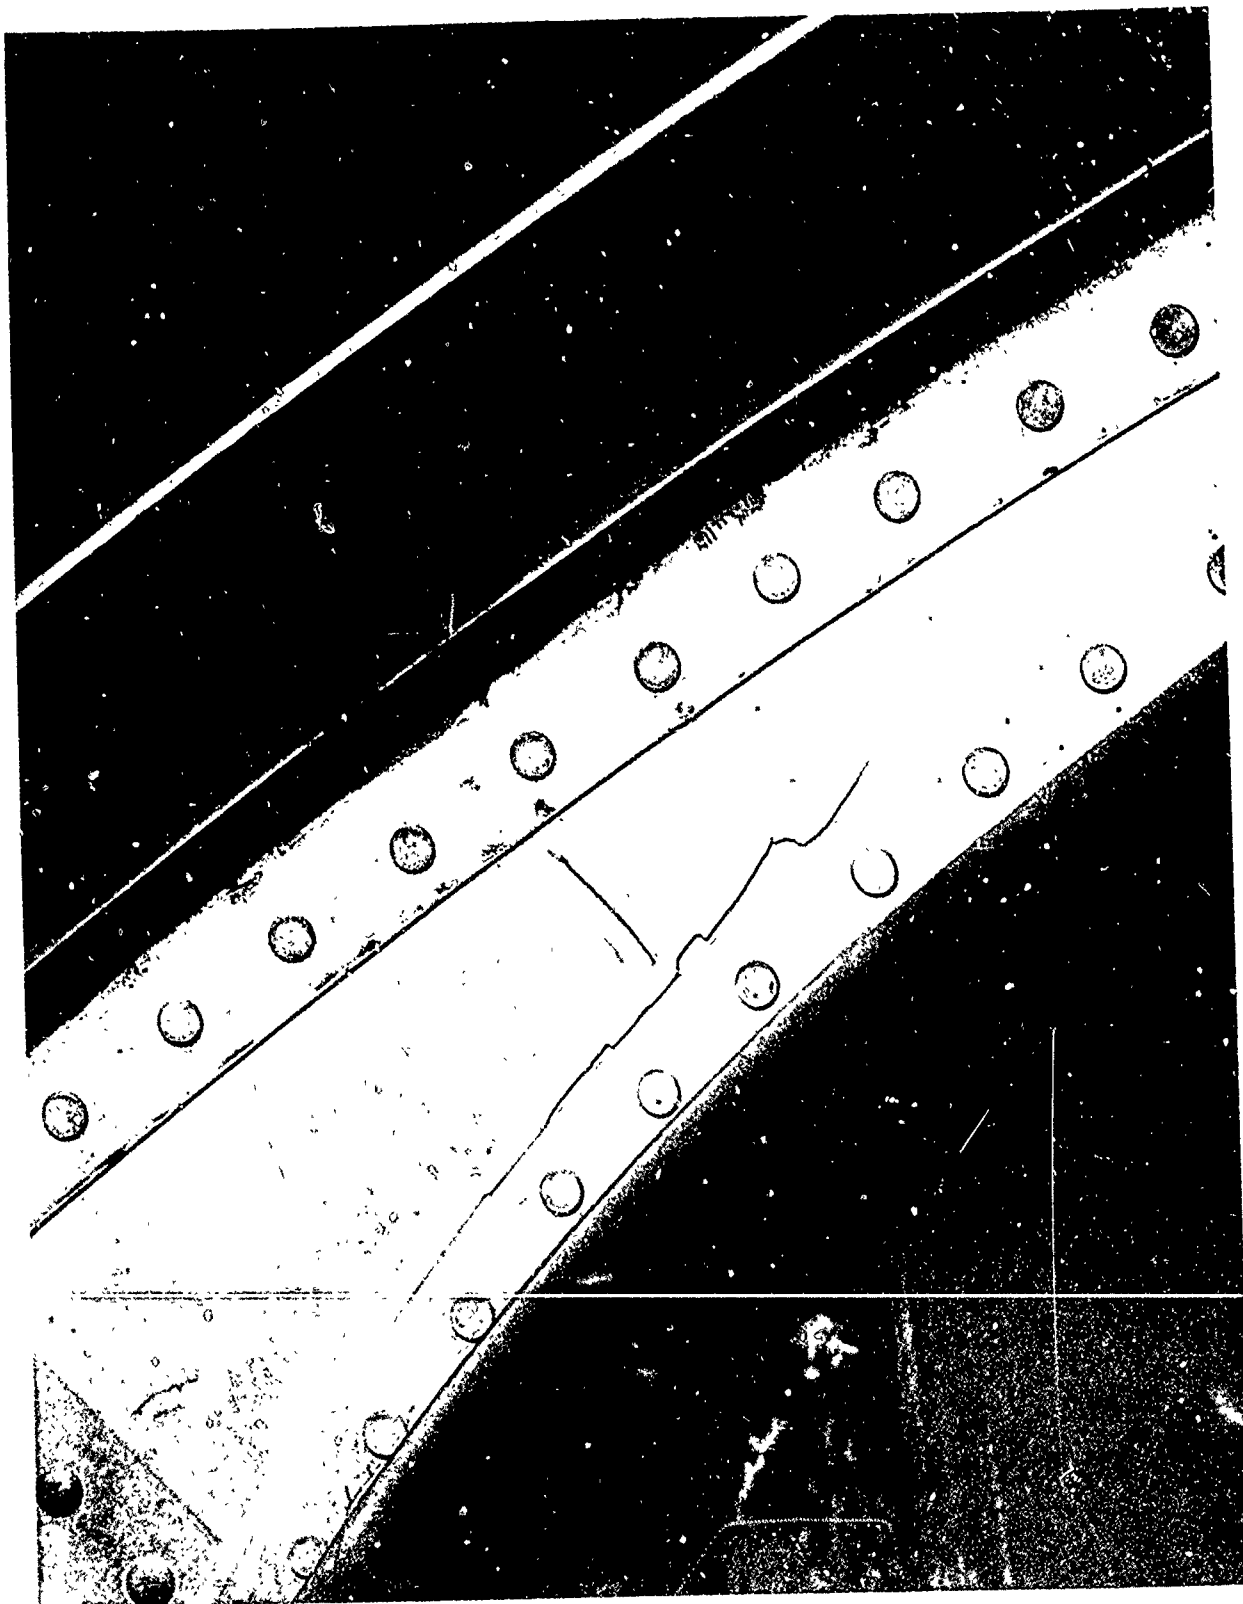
RIVETED FUSELAGE CANTED BULKHEAD ASSEMBLY;
